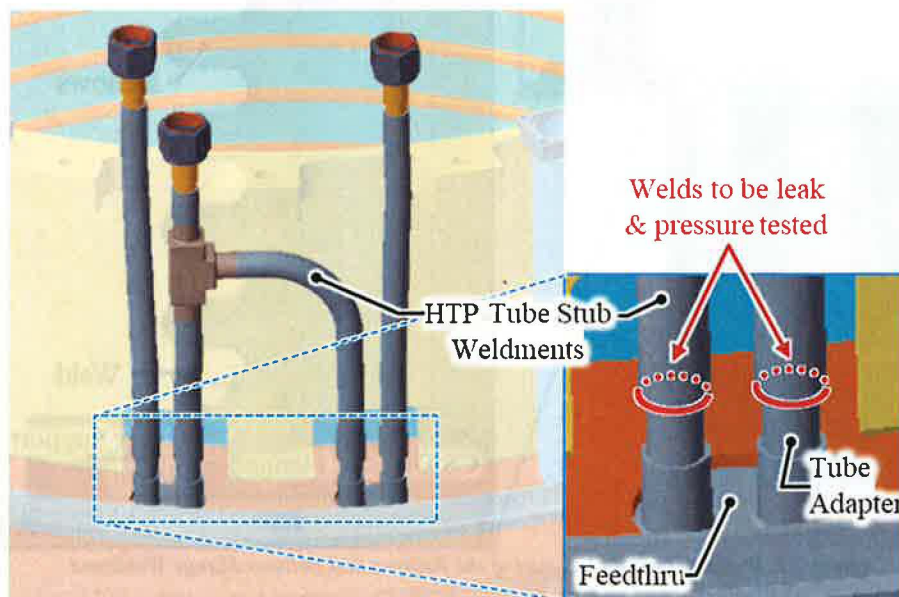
Welds to be tested during the installation of the HTP Inlet and Outlet Stubs
